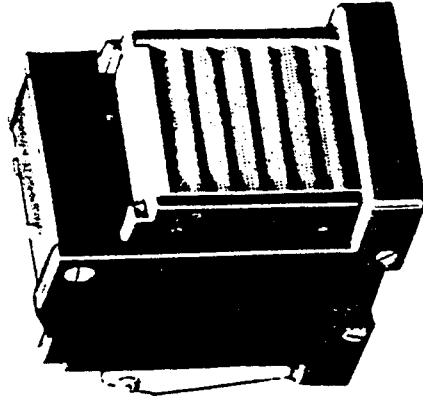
Back frame assembly for Type AK-2-100 breaker, front view.
